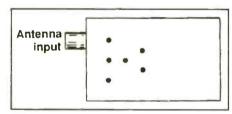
To gain access to the 340 313 1001 (1002, 1003, 1004, 1005) NAP tuner use a desoldering tool to remove solder at the points shown. Then remove the cover to expose the circuit board.
